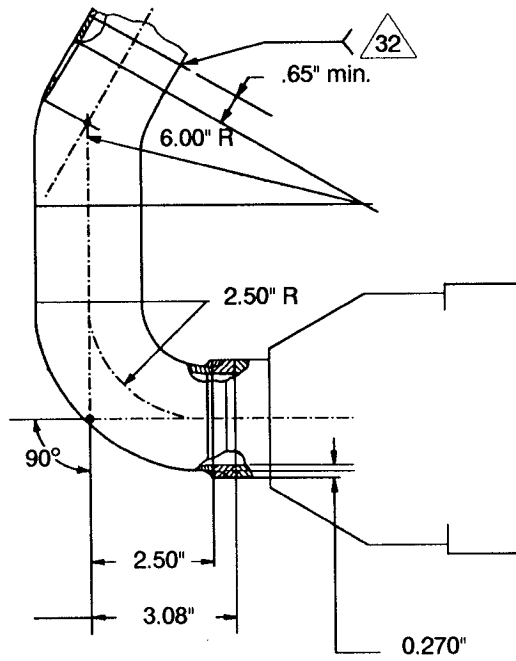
Detail of the LPFTP Turbine Drive Duct Near Weld 32
